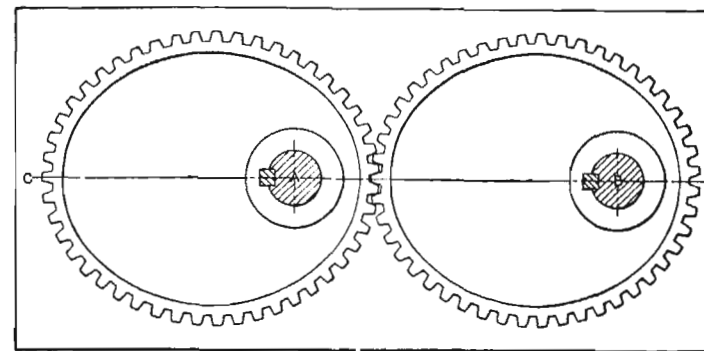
Elliptical Gearing Arranged to Return Driven Part Quickly
